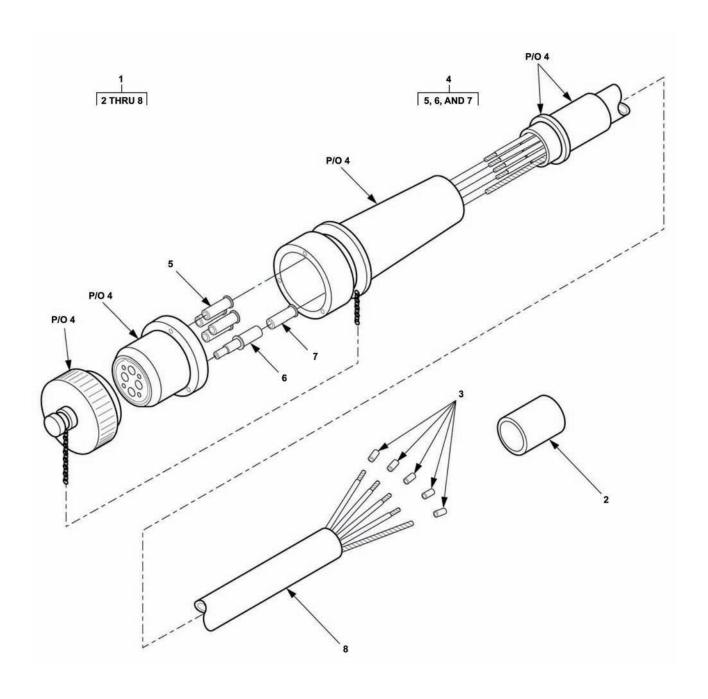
A. Cable Assembly, W19, AN/MJQ-48/48A.
